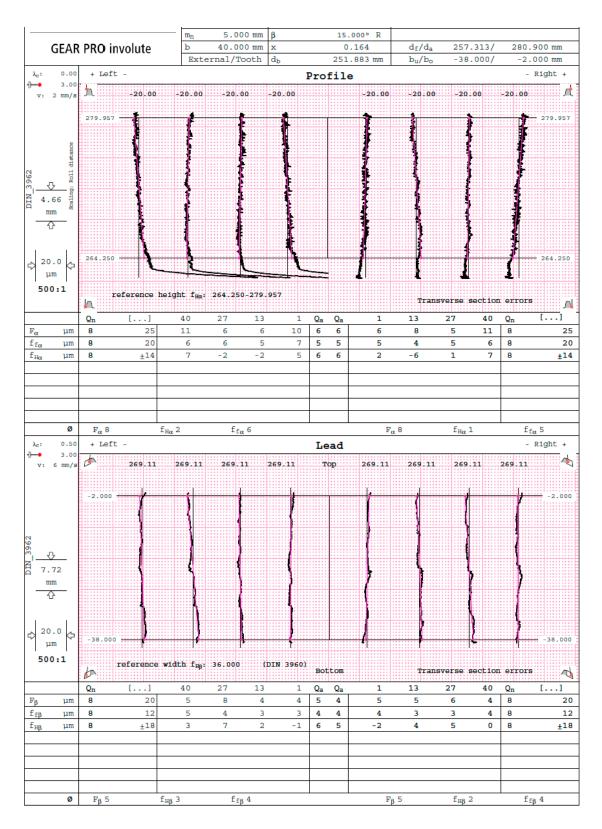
Gear measurement plot of manufactured soft gear, VP1.5.1.
